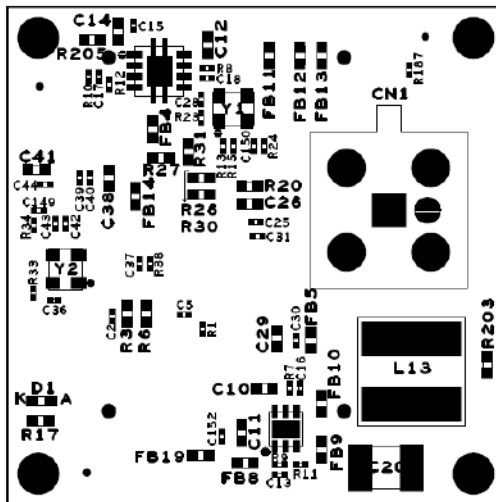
NileCAM21\_CUXVR Serializer Board Rear View
